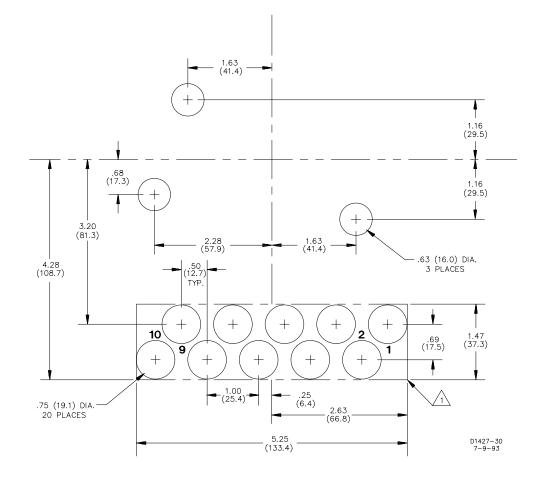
S1 Case, Single-Ended, Panel Drilling Diagram, Rear View
